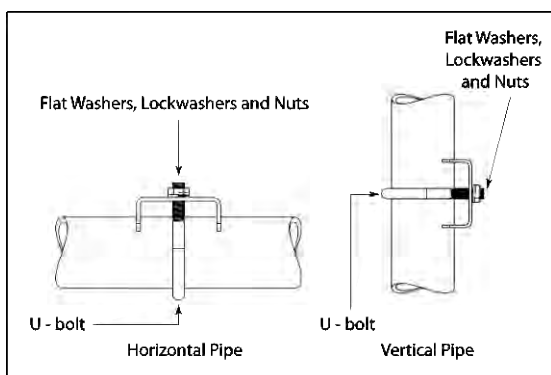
Pipe Mounting Bracket Secured to a Horizontal or Vertical Pipe
